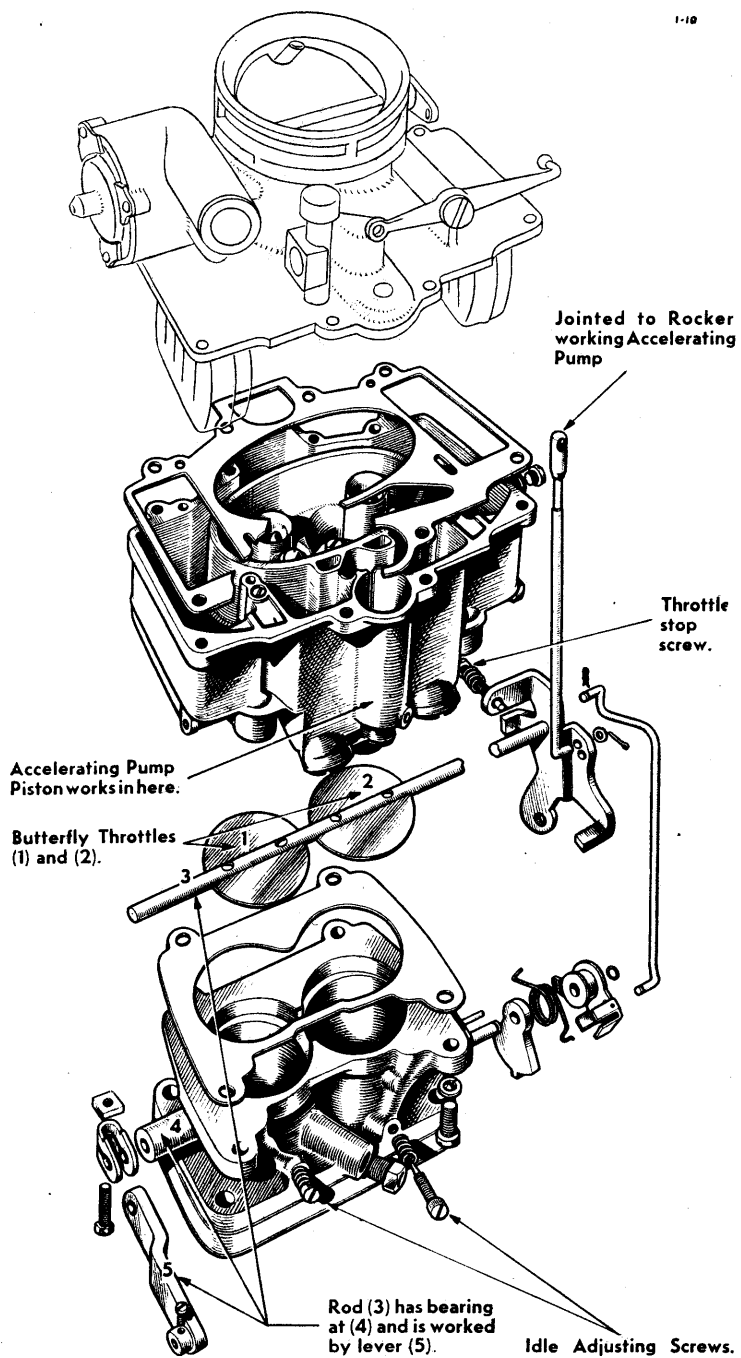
Dismantled view of Carburettor. See also Fig. 20
